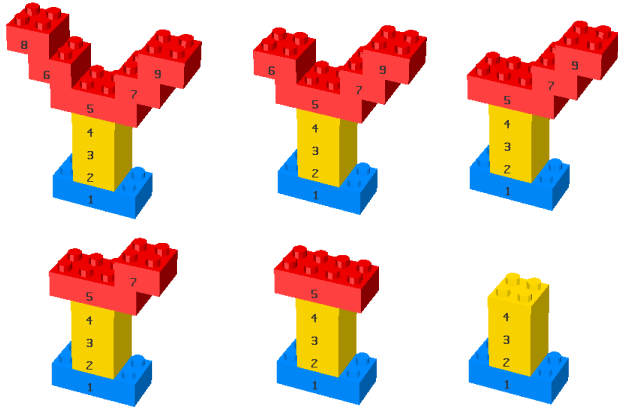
Final disassembly sequence for selected components C_5 and C_6 from the assembly of Fig. 1.
